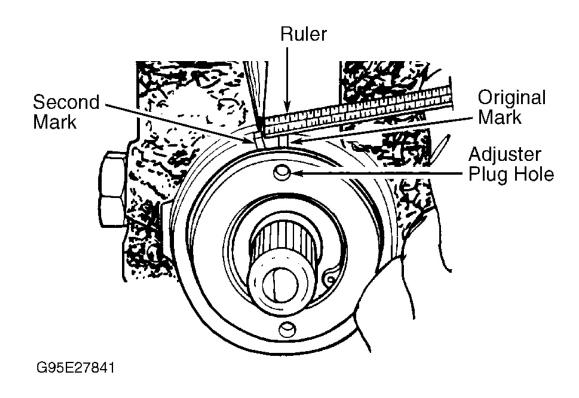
Measuring Worm Bearing Preload Courtesy of GENERAL MOTORS CORP.
